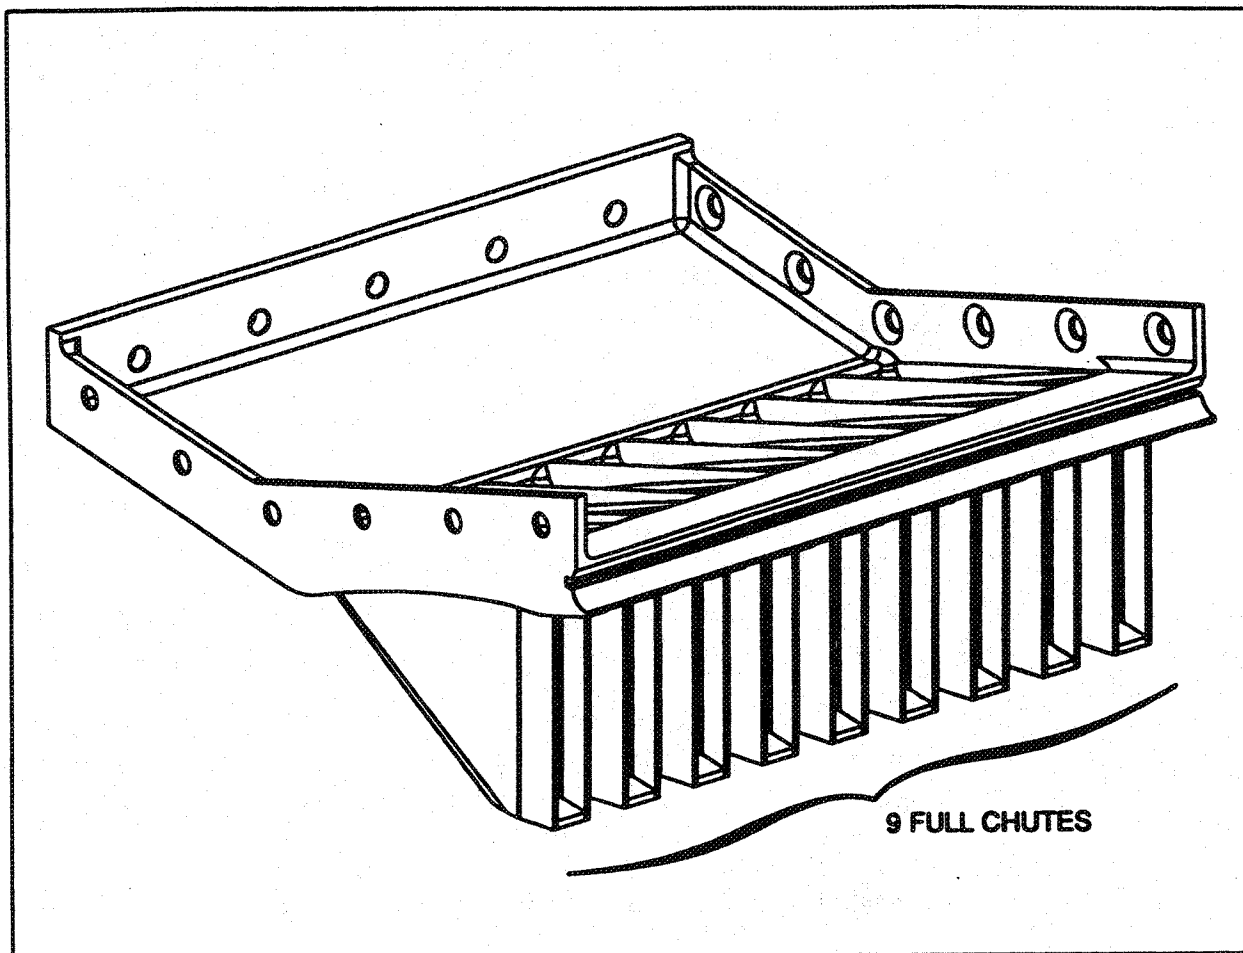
Isometric view and the details of SAR=2.8 nine CD-chute rack design for staggered mixer assembly (all dimensions are in inches).
